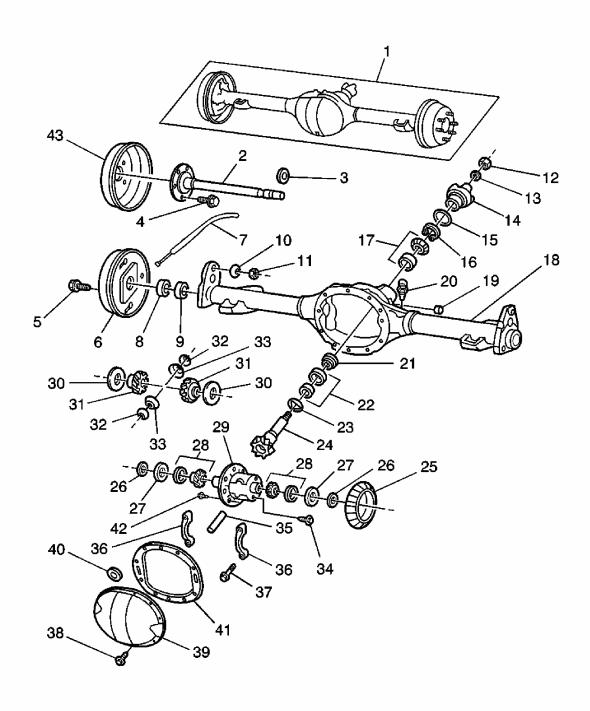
Rear Drive Axle Disassembled View Courtesy of GENERAL MOTORS CORP.
